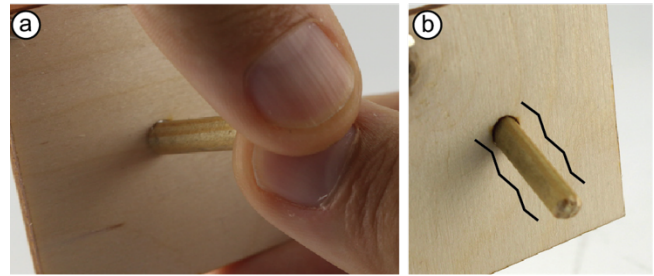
(a) When fabricated on a machine with smaller kerf, this bearing gets too tight. This causes friction or even prevents users from inserting the axle. (b) On machines with wider kerf, bearings are subject to slack, potentially causing adjacent mechanisms to jam.
